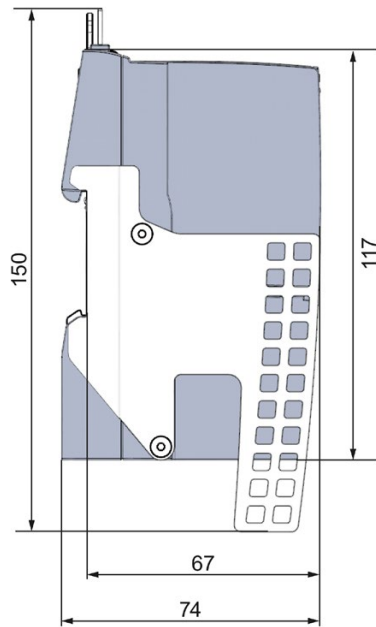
Dimension drawing CPU 1515SP PC2, side view
